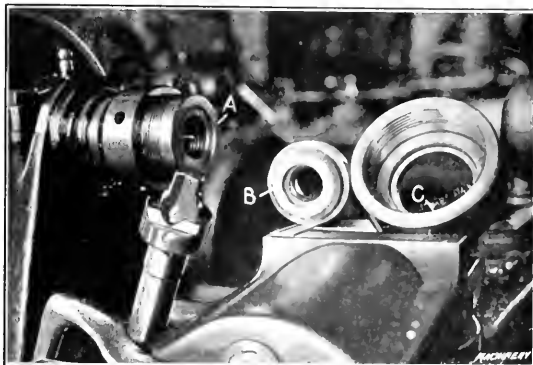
Chuck used for holding Combination Blanking, Cupping and Drawing Die Blank when machining the Hole
